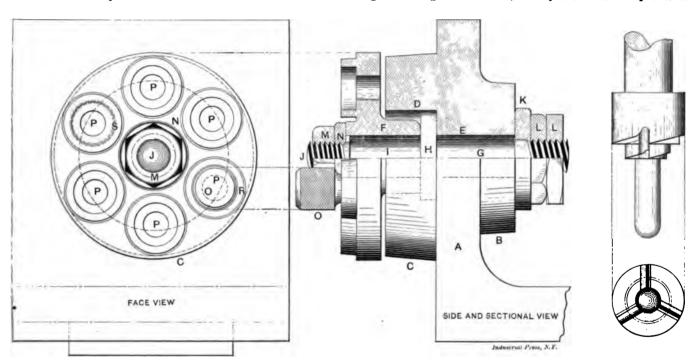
Fixture for Milling and Counterboring the Bosses in Fig. 11. Combination Counterboring and Facing Tool used with the Fixture in Fig. 10.
